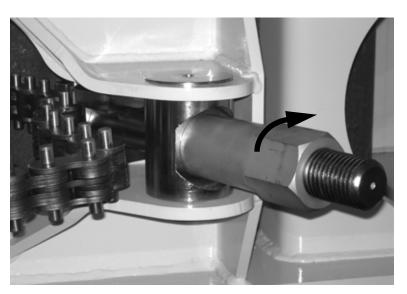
Turn the chain tensioning nut clockwise to secure the saw to the workpiece.
